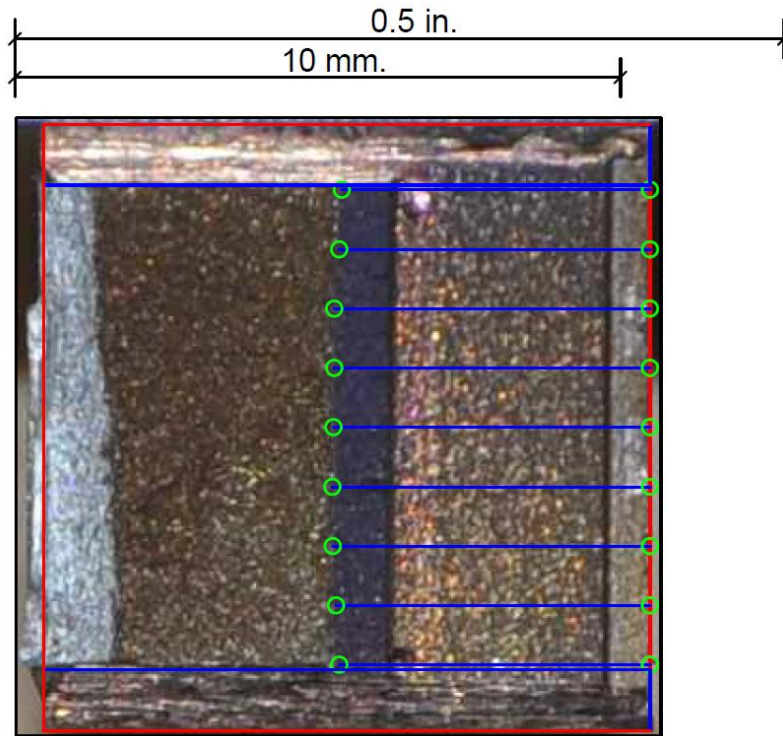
Specimen F25' Fracture Surface
